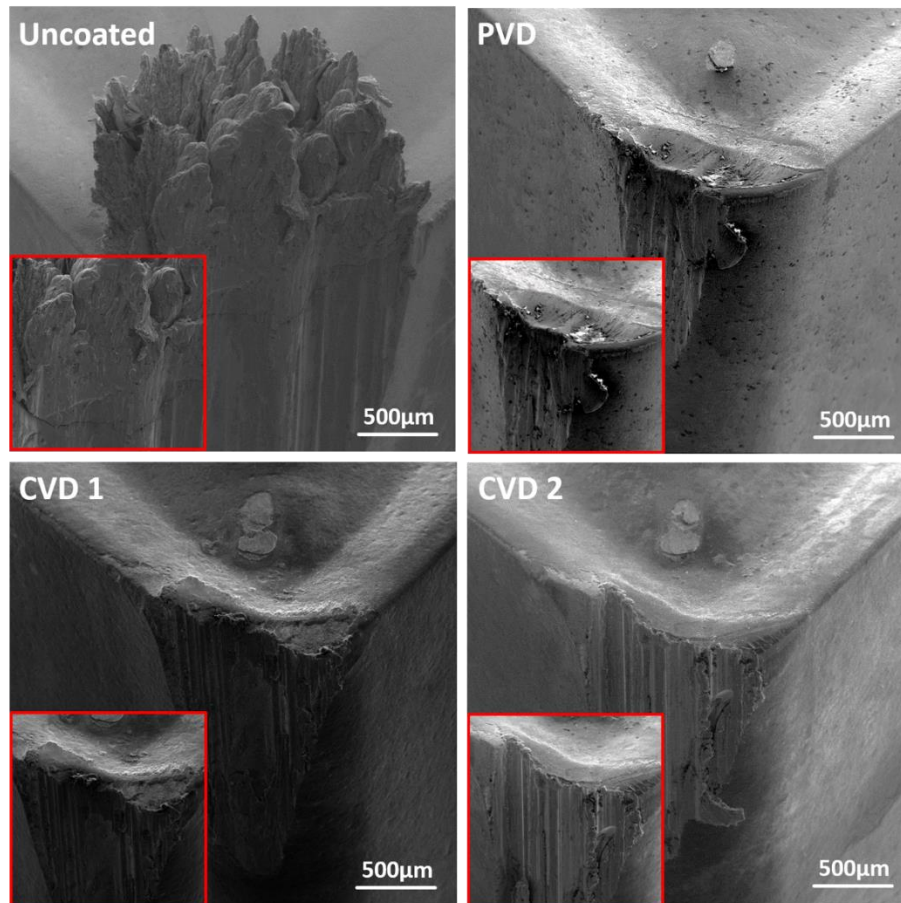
Tool wear patterns evaluated by SEM on the cutting inserts after machining SS304 (end of tool life data).
